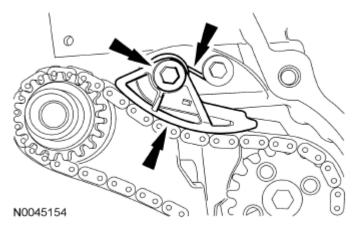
Locating Oil Pump Drive Chain Tensioner, Bolt And Tensioner Spring Courtesy of FORD MOTOR CO.
